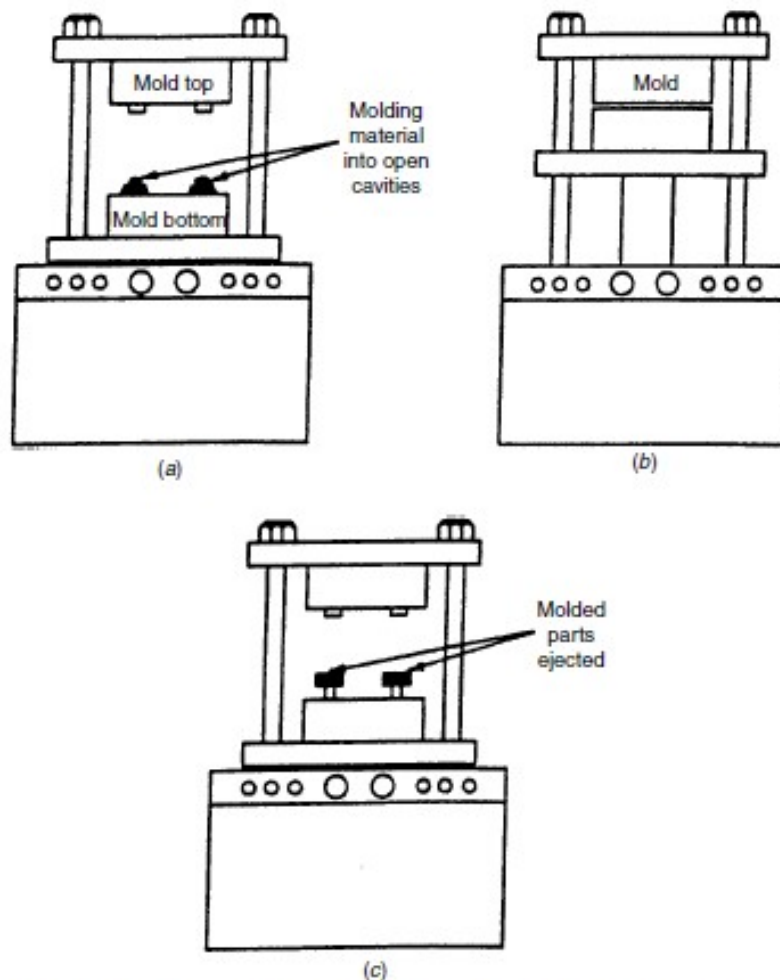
Compression molding sequence: (a) molding material is placed into open cavities; (b) the press closes the mold, compressing material in the hot mold for cure; (c) the press opens and molded parts are ejected from the cavities.
